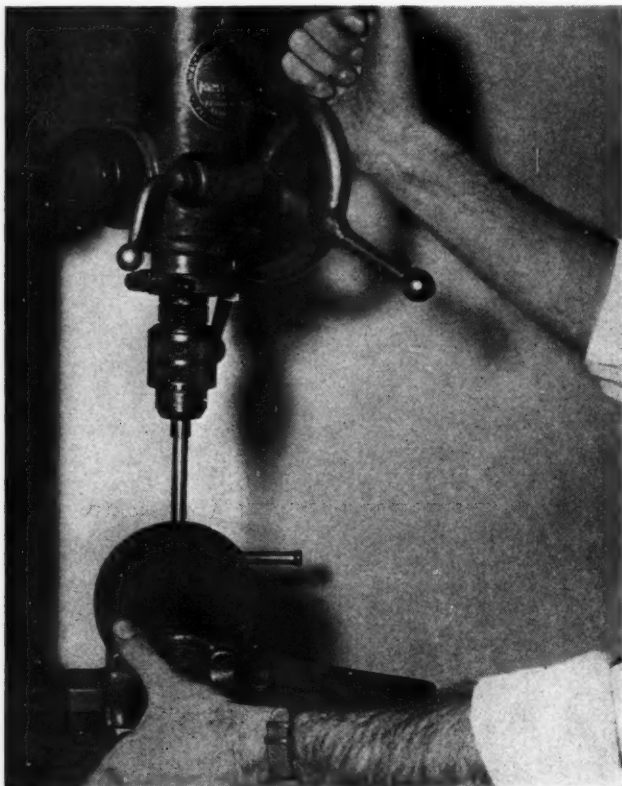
Cutting a test-specimen with a hollow cutter in a drill press.
